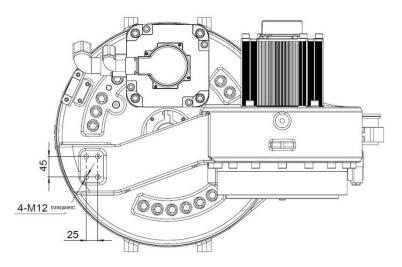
AIR50-2700/AIR80-2560 shoulder interface dimensions
